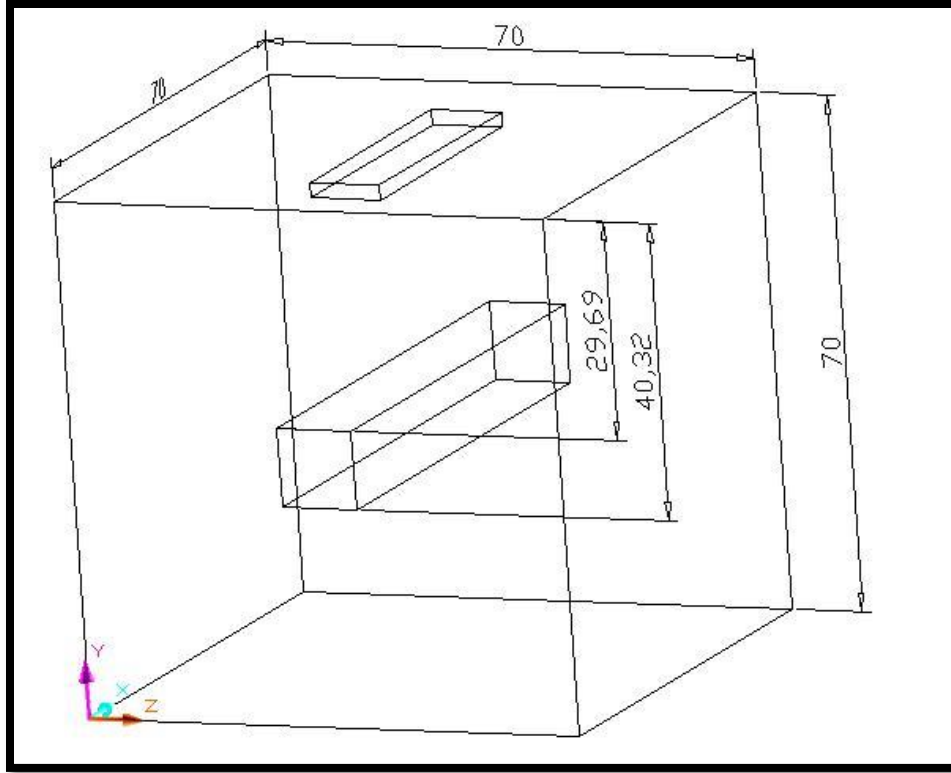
3D view for Dimension of Square shape cross-sectional cooling channels
